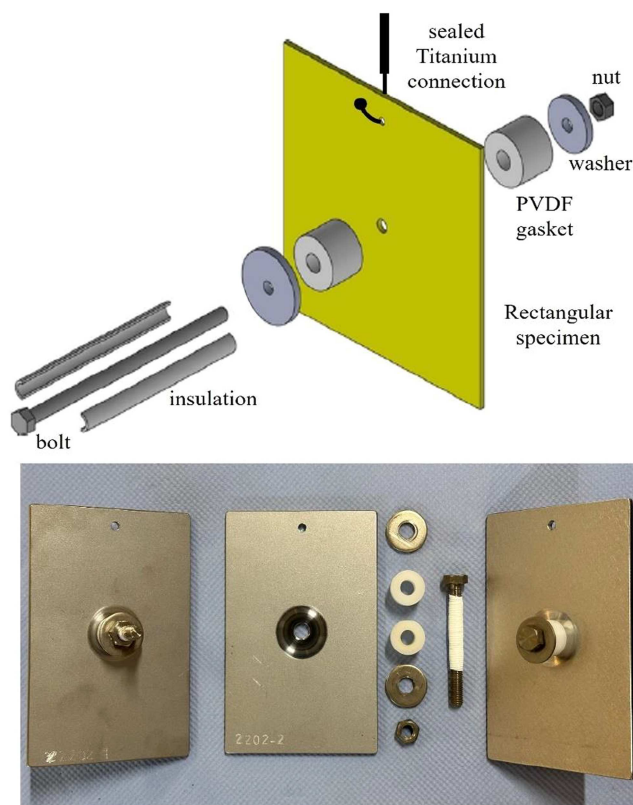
| Crevice test assembly, consisting of a test plate, electrical connection, and crevice former elements. [Color figure can be viewed at wileyonlinelibrary.com]
